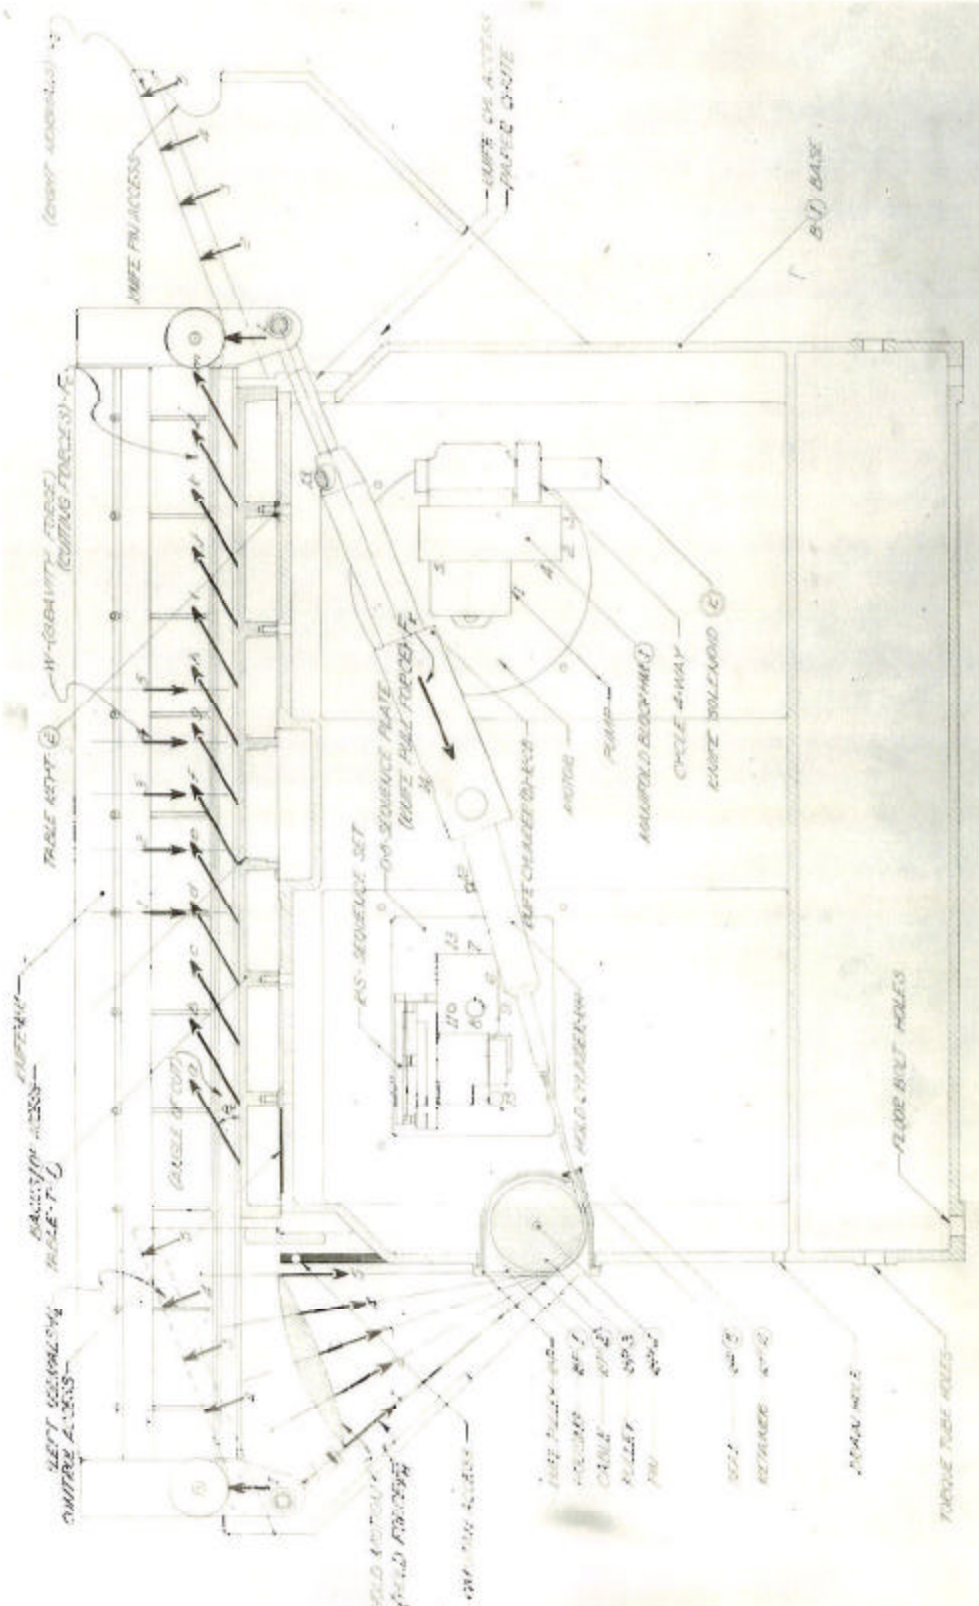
Assemblies: Hydraulic - H, Knife - K, Knife Pulley - KP, Base - B, Table - T
